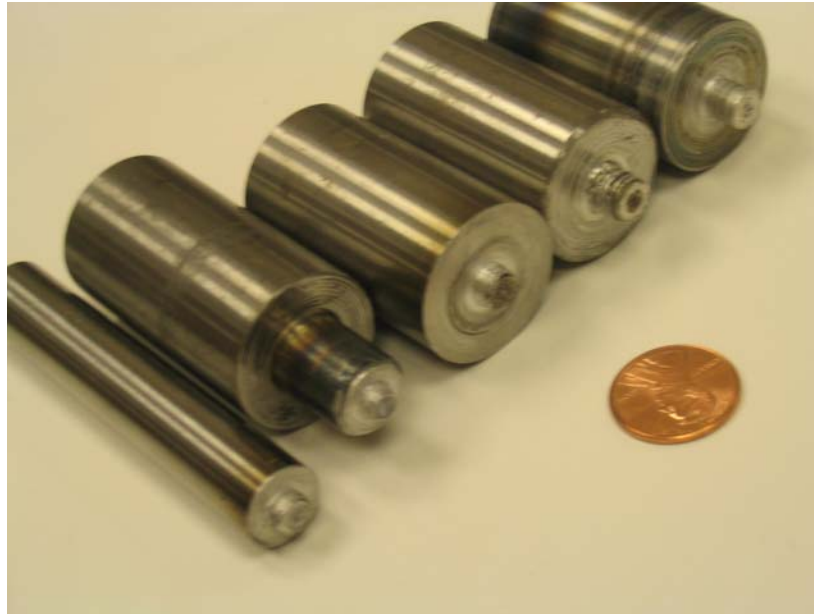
FSP tool designs latest to the oldest (left to right)
